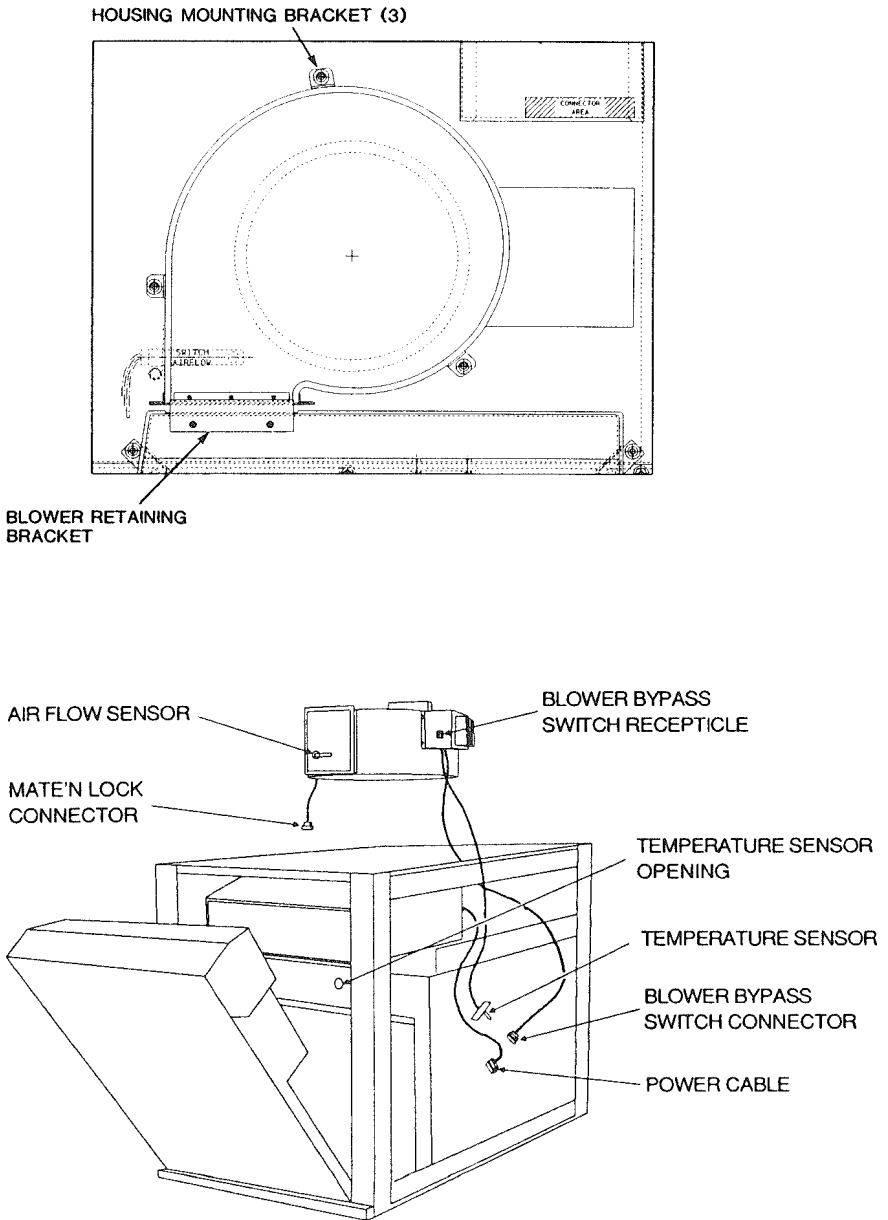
BLOWER ASSEMBLY REMOVAL
